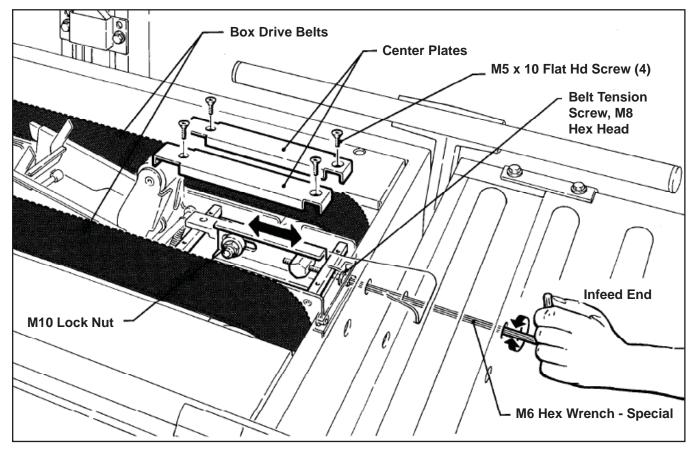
Box Drive Belt Tension Adjustment, Lower Belts (Infeed End)
